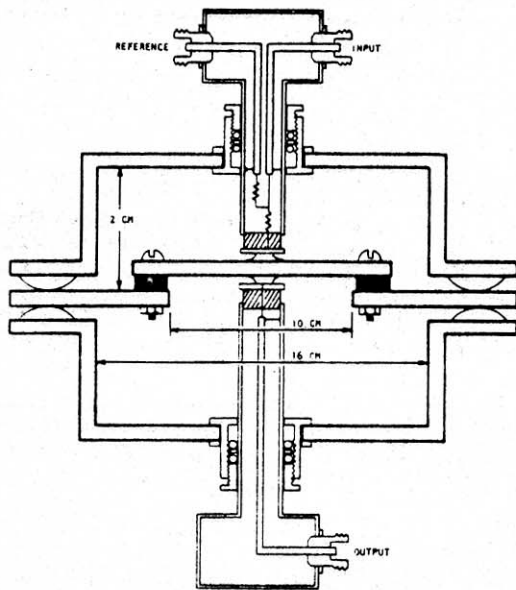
MAGNETIC-FIELD TEST FIXTURE
